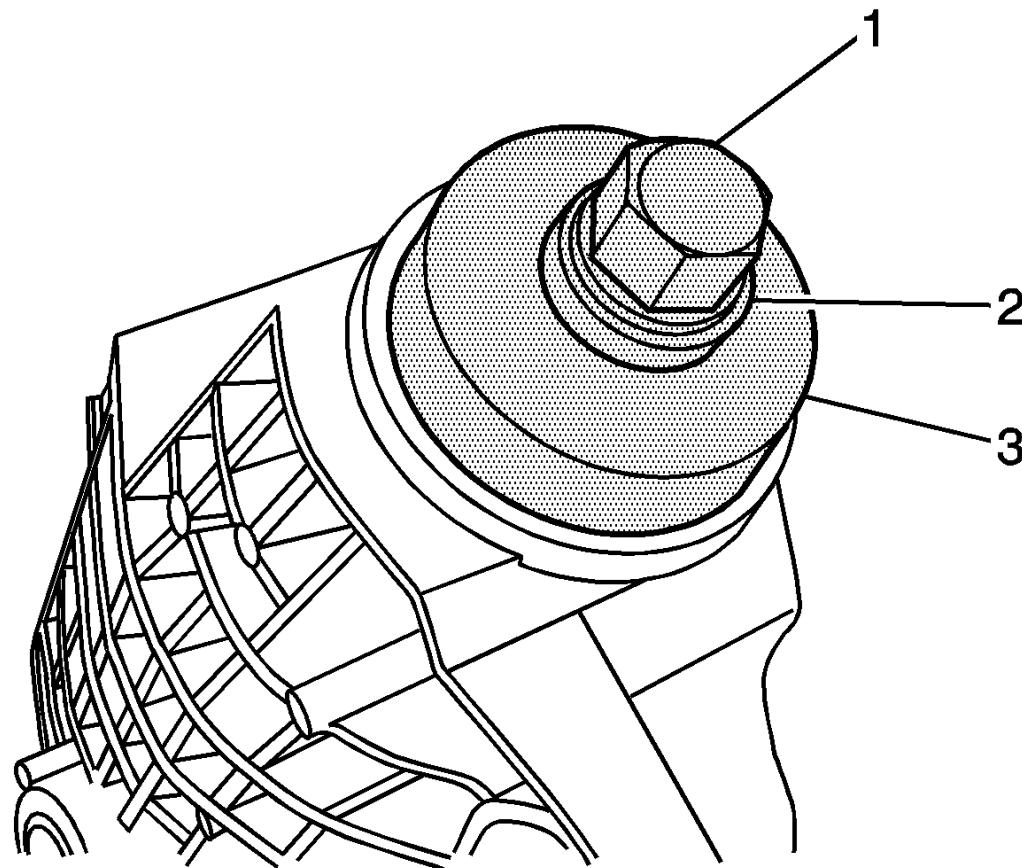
View Of Thrust Bearing & Washer, Forcing Screw & Special Tool J 45858-3
